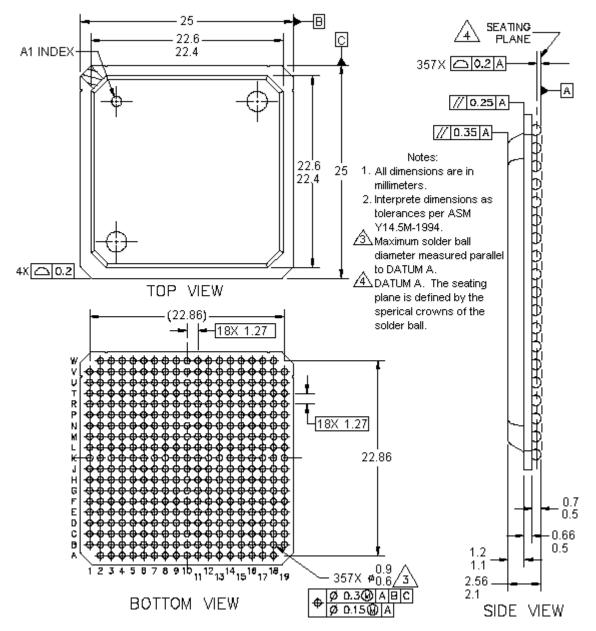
MPC8241 Package Dimensions and Pinout Assignments (ZQ and VR Packages)
